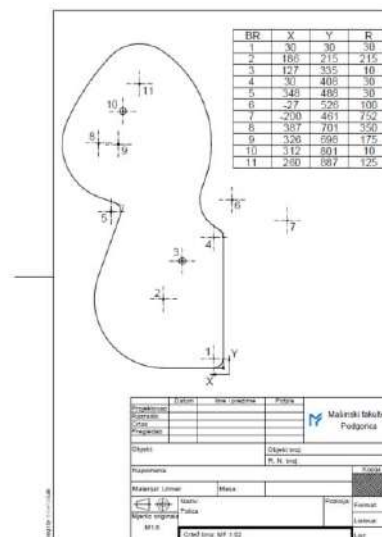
Engineering drawing of the coupler (the shelf of the blind corner cabinet)
